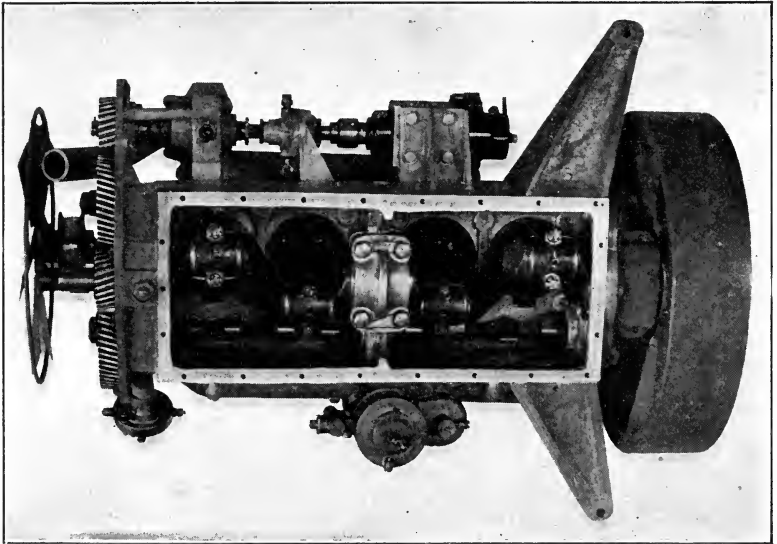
Bottom View of Inter-State Power Plant. Crank Case a Barrel Form with Removable Bottom Plate to Permit Access to Engine Interior. Important Power Plant Parts Clearly Shown.
